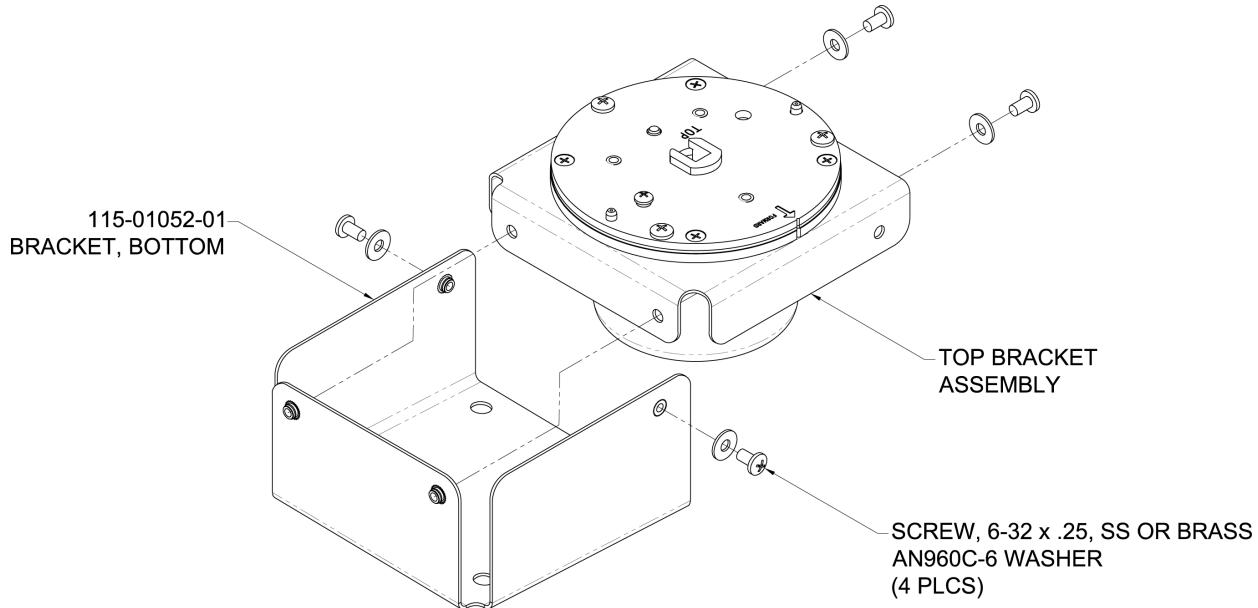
Lancair IV/IV-P GMU 22 Mounting Bracket
